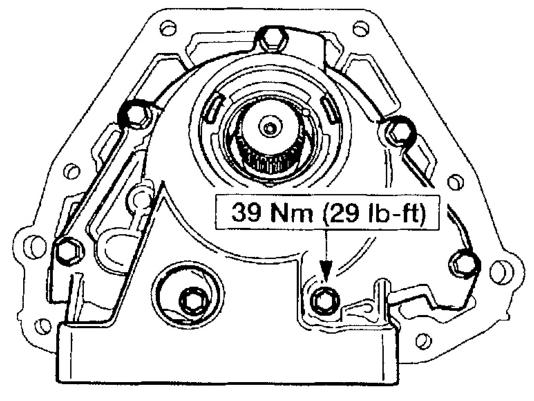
Installing Parking Pawl Assembly & Gasket
